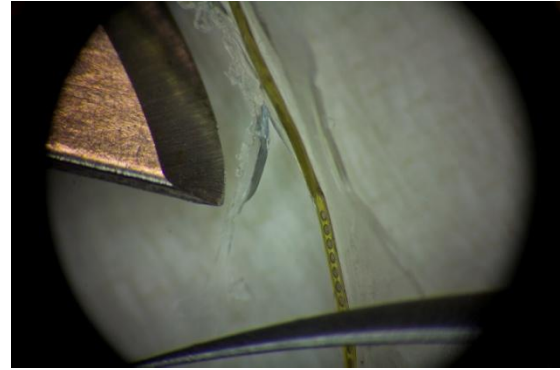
Removing excess silicon adhesive “flanges” from the molded assembly is critical for ensuring that the final product is thin enough to be implanted through the first turn of the cochlea.
